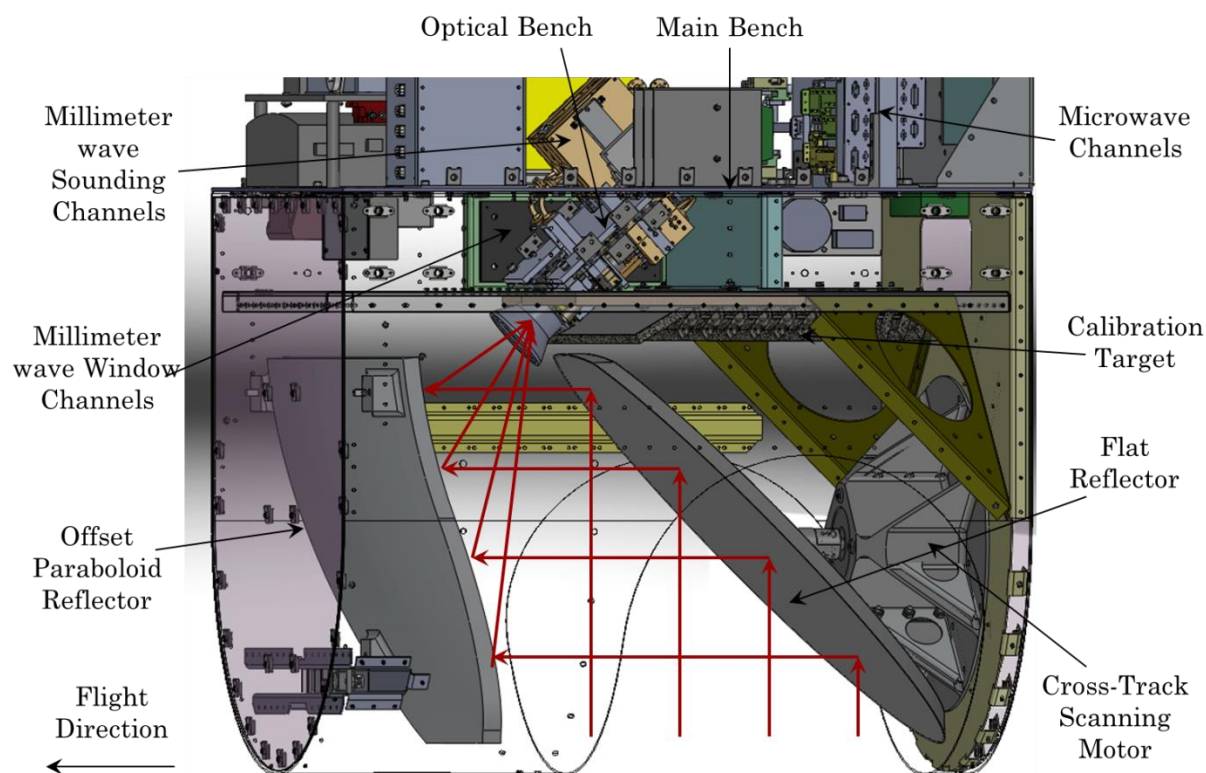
Side View of HAMMR CAD Model in Nadir-Viewing Position
